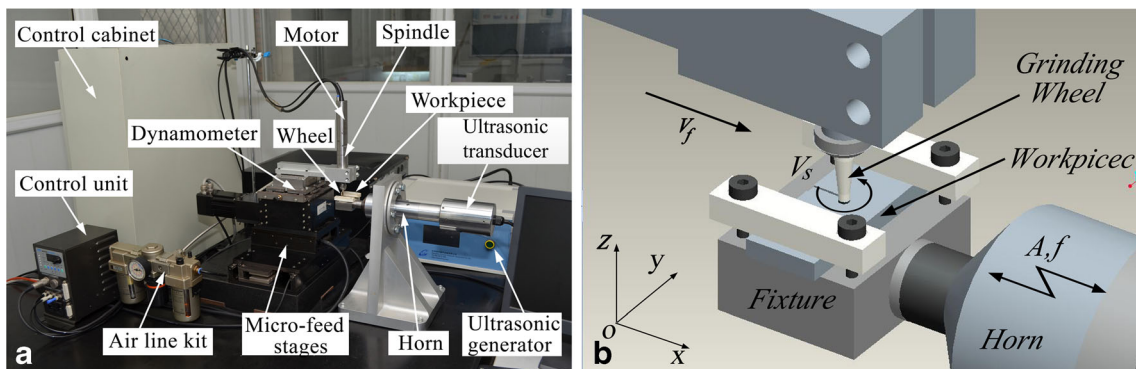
Experimental setup. a The machine tool and b amplified drawings
